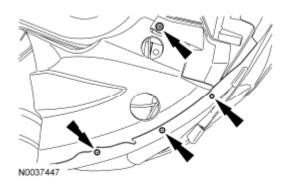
Locating LH Fender Splash Shield Mounting Screws
